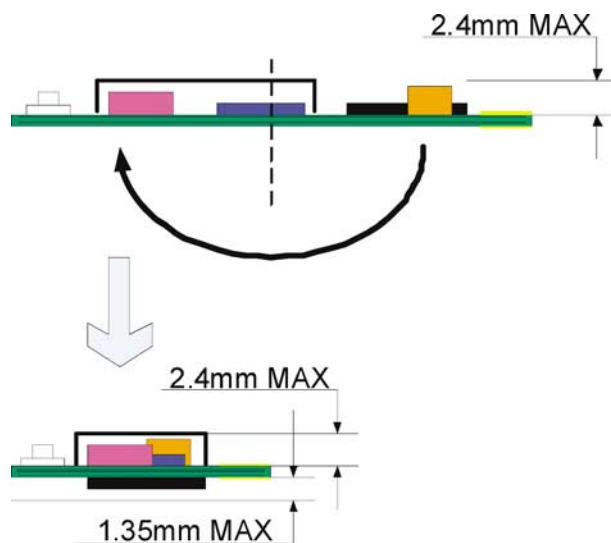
Folding the single-sided Full-Mini Card to yield a dual-sided Half-Mini Card.
